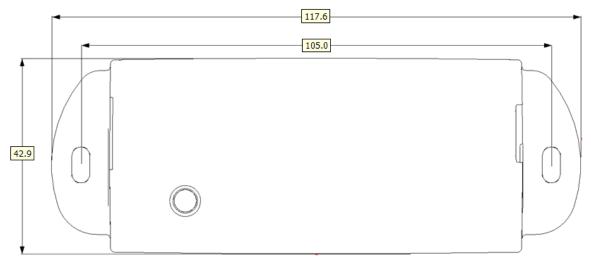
LDSBUS Thermocouple Sensor Adapter Dimension - Top View
